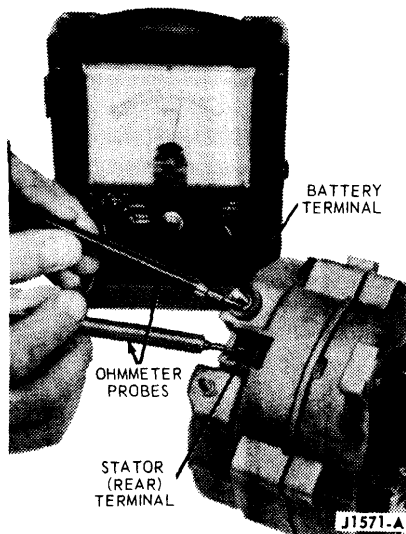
Rectifier Short or Grounded and Stator Grounded Test
